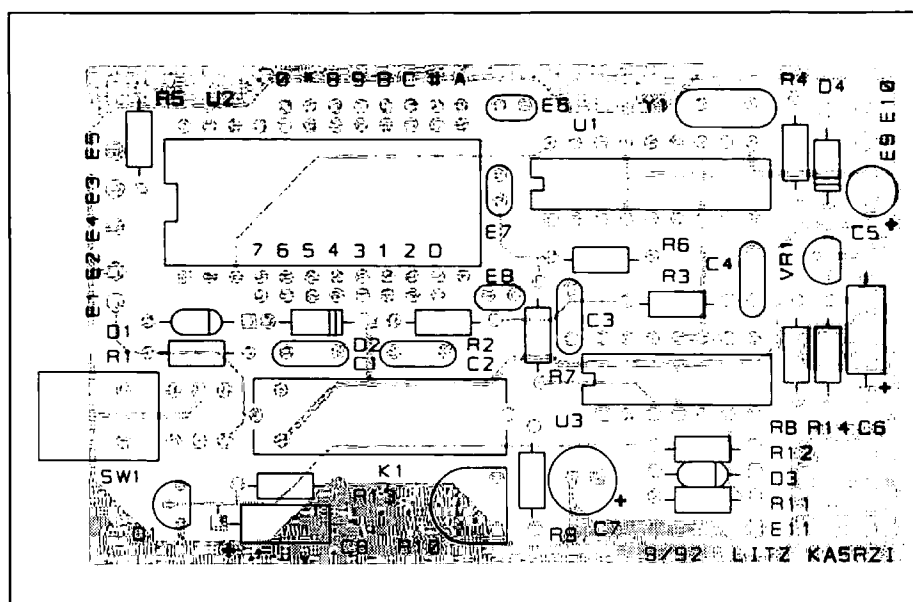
Parts placement diagram. (If you make your own PC boards, you will need to solder leads on both sides where necessary. This won't be necessary if using the board available in the parts list since it has plated-through holes.)
